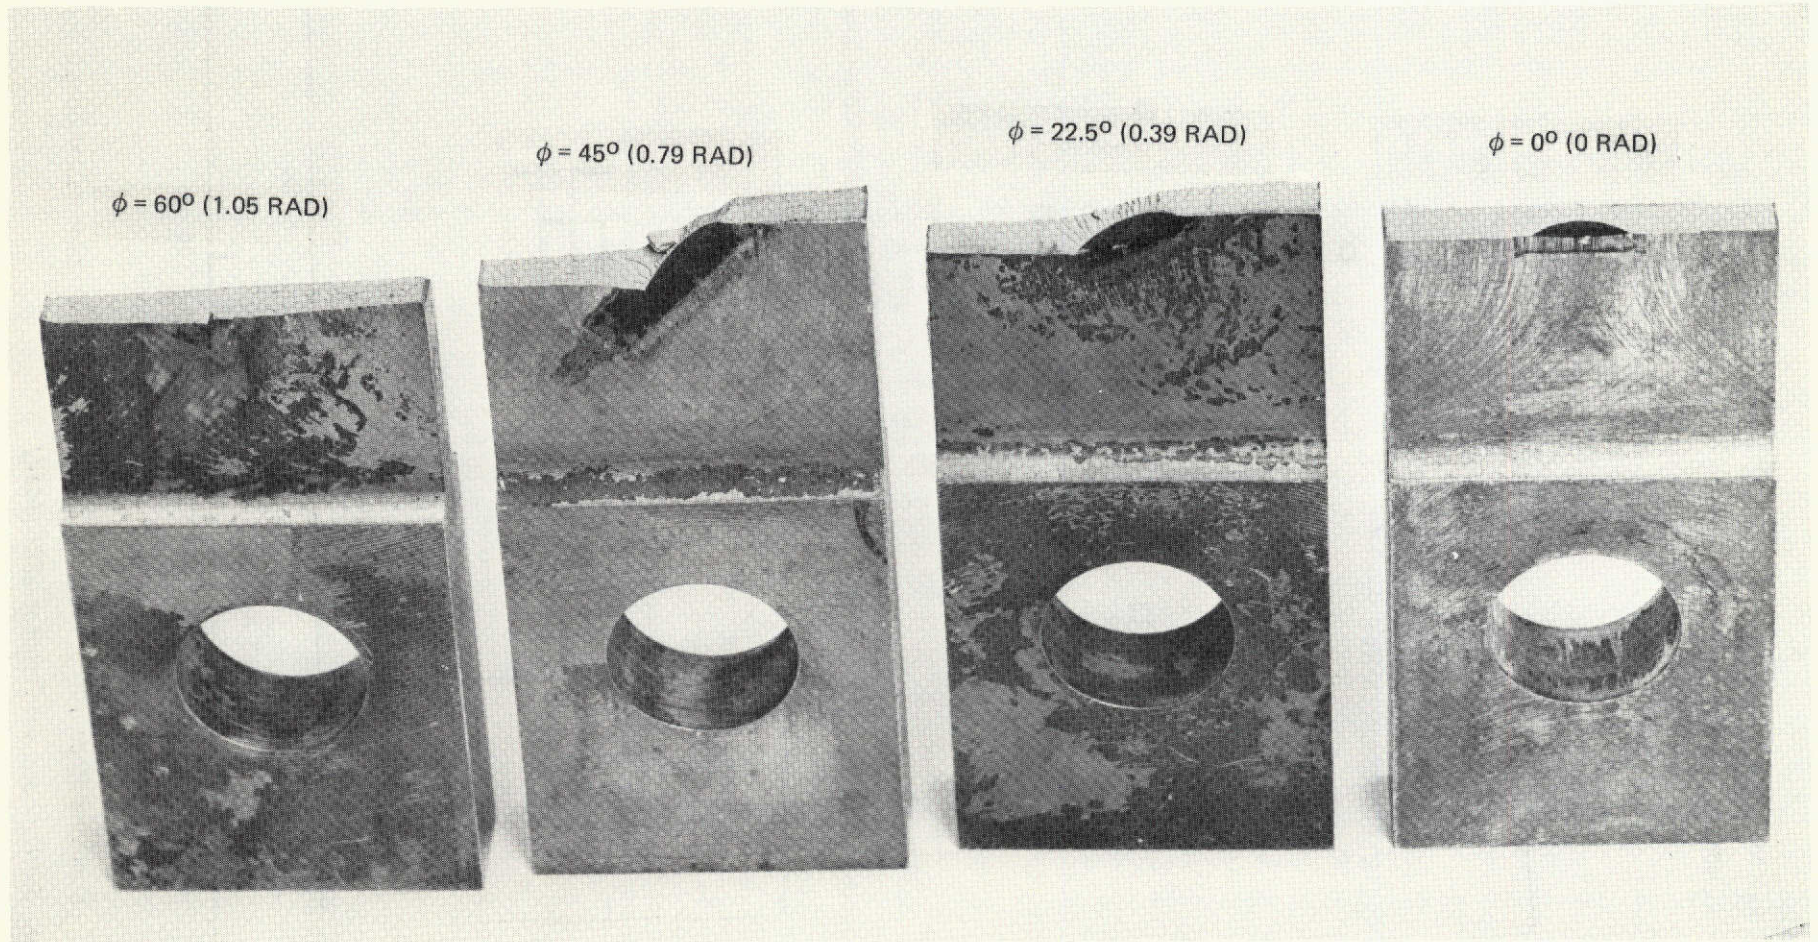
Fracture Surfaces of Inclined Surface Flawed Specimens Subjected to Combined Modes I, II and III
